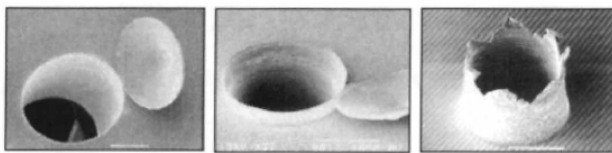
(From left to right) Uniform burr, transient burr, and crown burr in AISI 304L [4]
